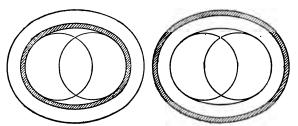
Outside Flange. Fig. 59.—Inside Flange. Elliptical Angle-iron Rings.
